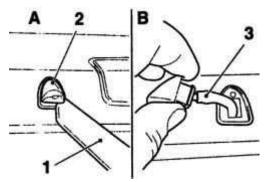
Removing the nozzle: 1 - plastic wedge, 2 - burner, 3 - inlet hose
